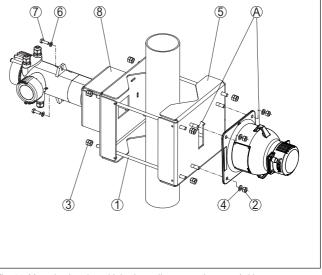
Mounting bracket with horizontally mounted sensor (with VEGASOURCE 81, 82)
